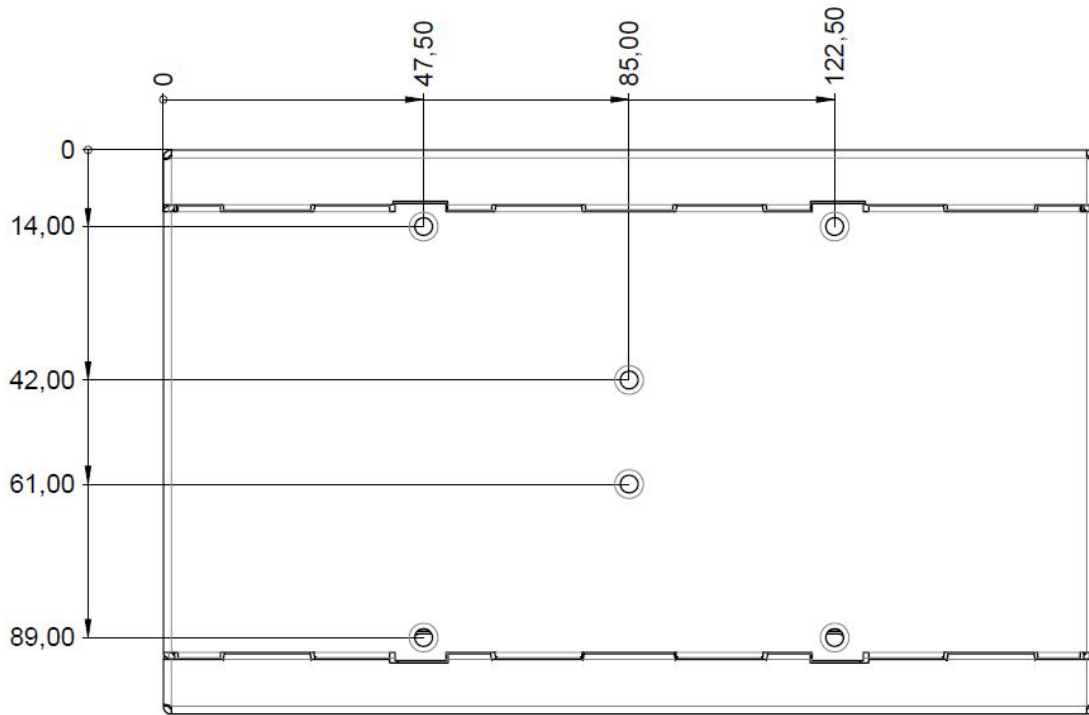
Industry Computer MBox-Advanced-E41M Position of mounting holes, Bottom View
